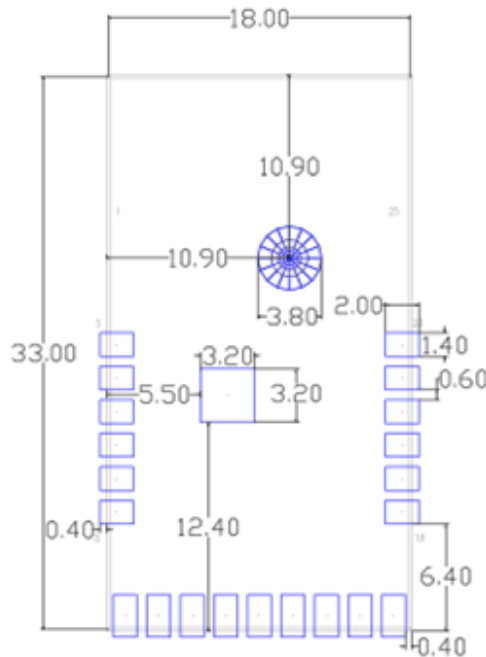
General assembly dimension drawing (unit: mm, error ± 0.1 , external dimension error ± 0.2)
